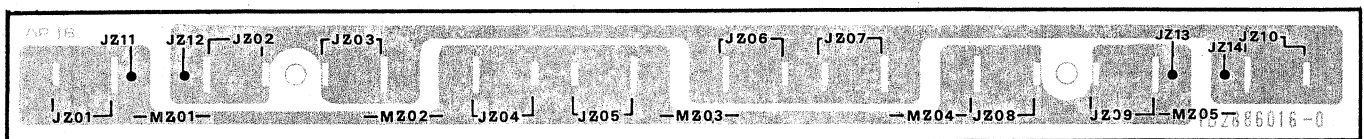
Dial Lamp Board – PZ01 Component Assembly Diagram
